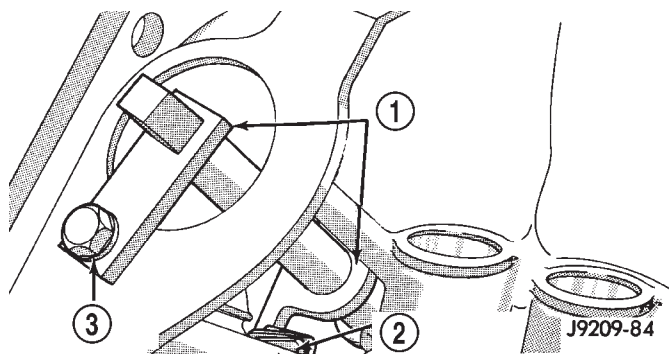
Camshaft Holding Tool C-3509 (Installed Position)
